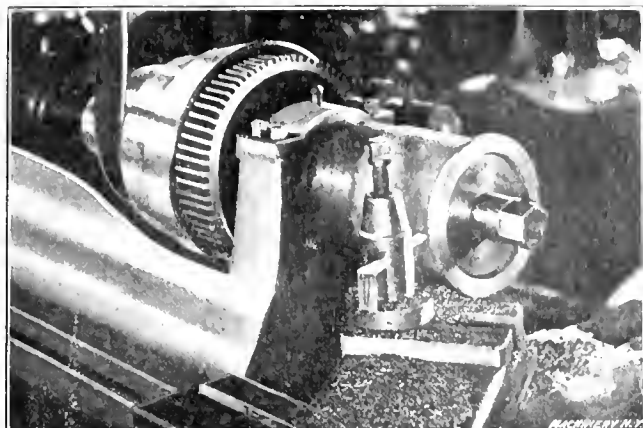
Turning the Chucking Flange on Piston Ring Casting
